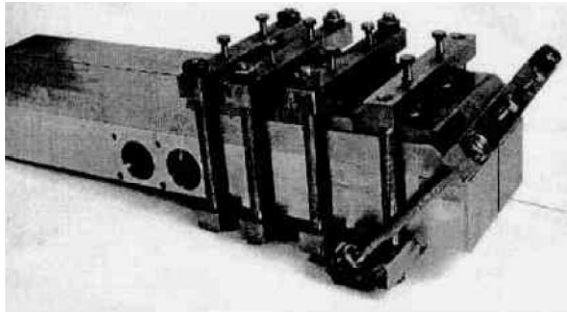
FW mock-up with Be tiles assembled for brazing [10].
